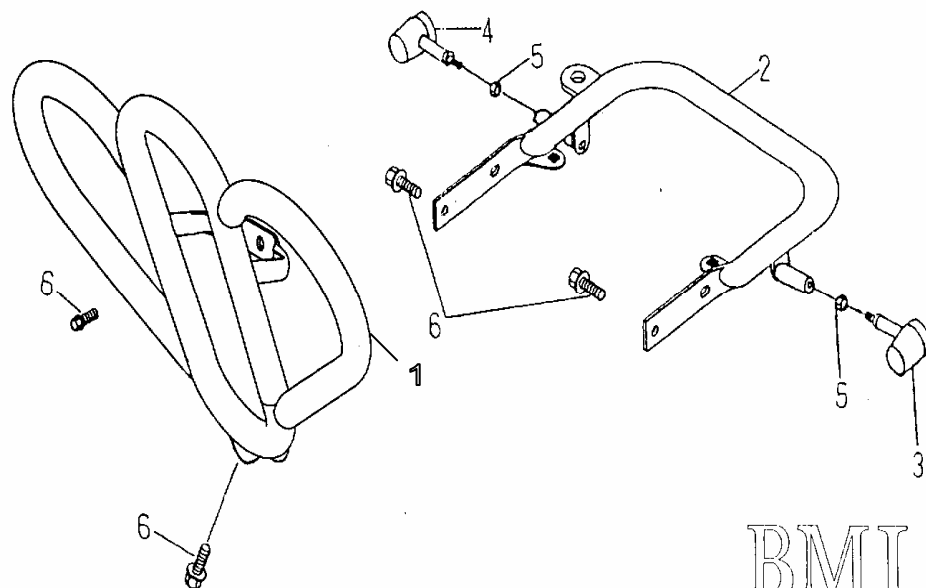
GUARD 保護桿 (FOR OIL COOLER)
